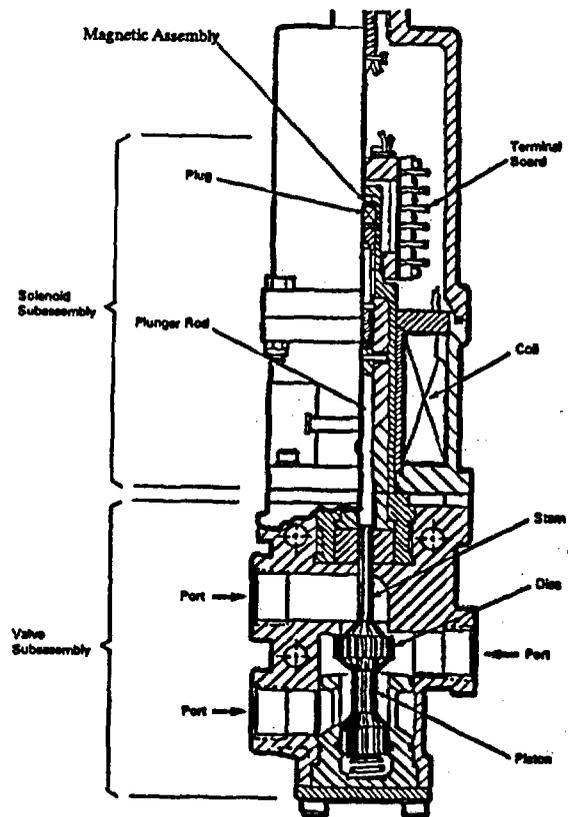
Schematic drawing of a Valcor solenoid-operated valve
